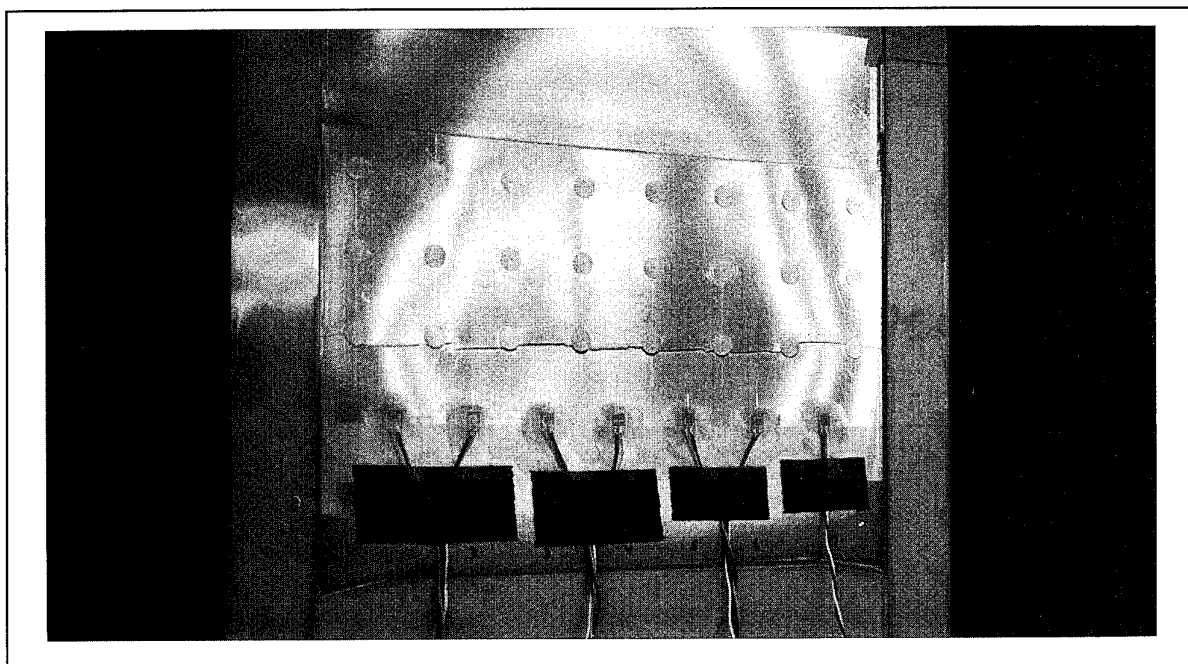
Fully cracked MSD test specimen under 32.1 kN (7,219) lb load.
